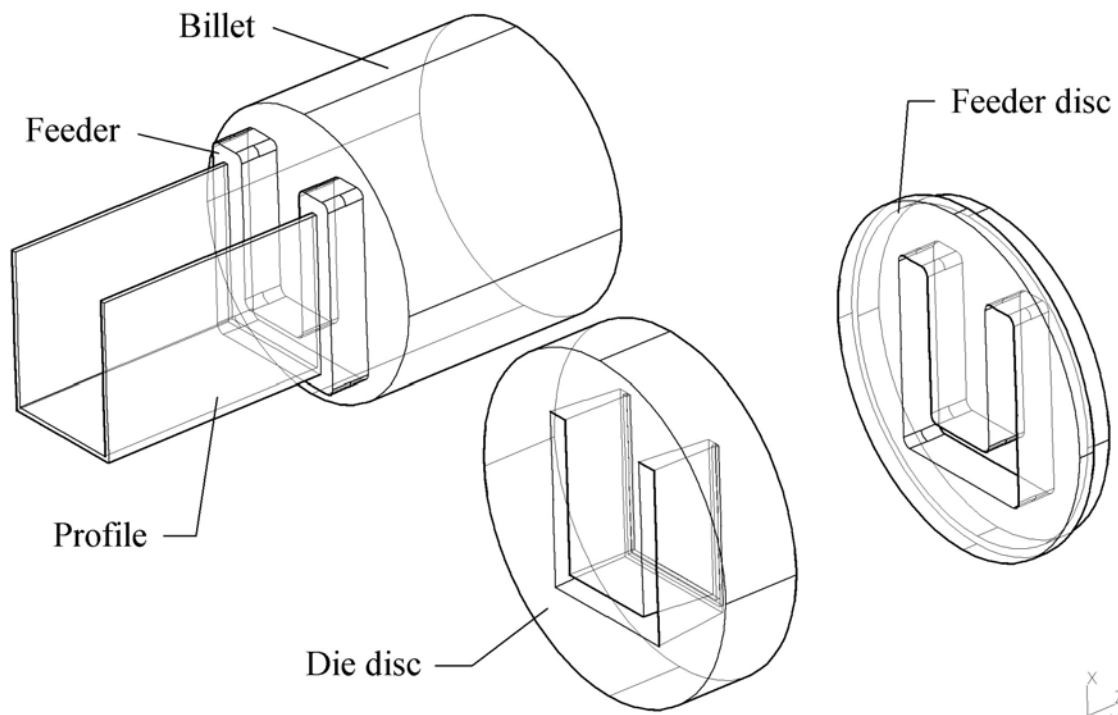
The principle of open profile extrusion. The feeder disc, the die disc and the partly extruded aluminium billet/profile are shown.
